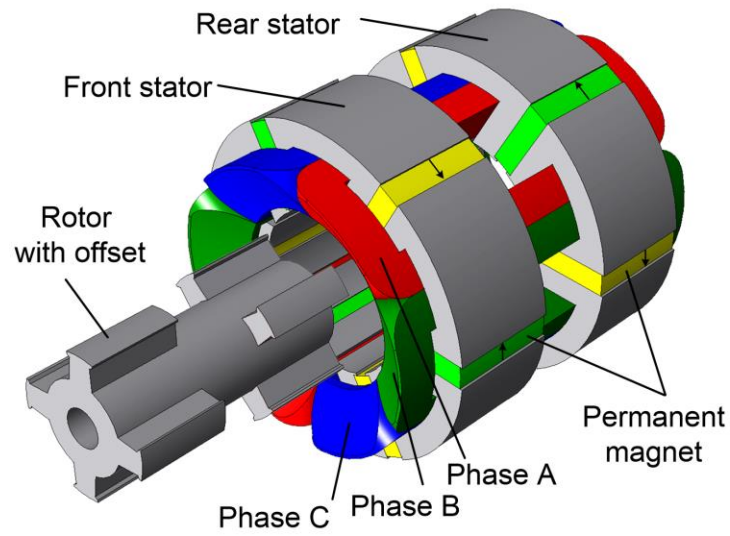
Exploded view of proposed Topology-I of the dual-stator 6/4 FSPM machine.
